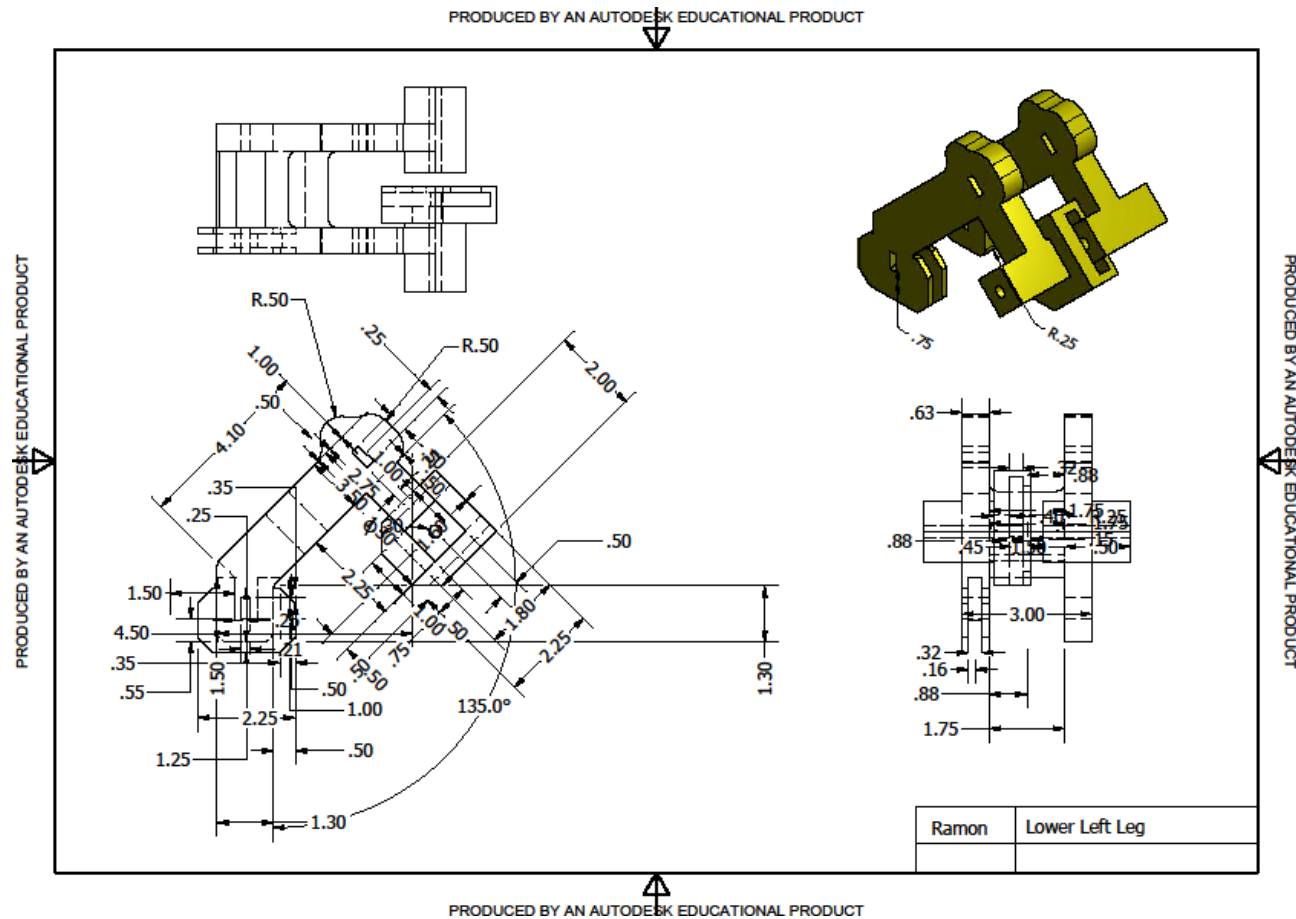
CAD drawing of the Lower Left Leg of the 6-DOF sensor.
